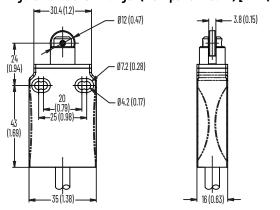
Roller Plunger (Panel Mount) [mm (in.)]
